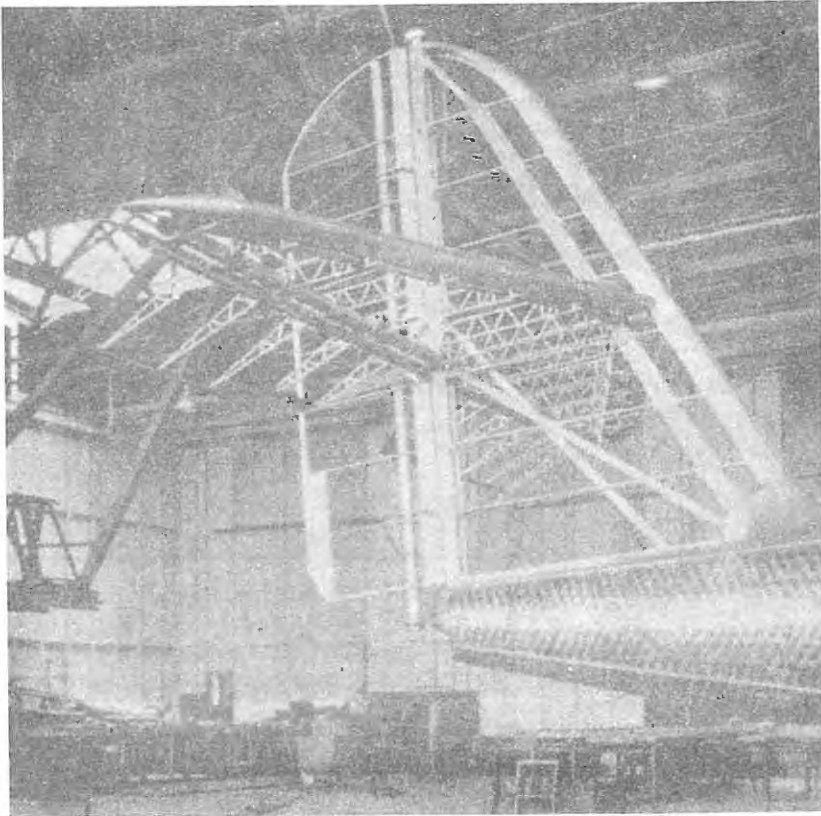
Skeleton Tail Assembly: 18-8 Steel Spot Welded
